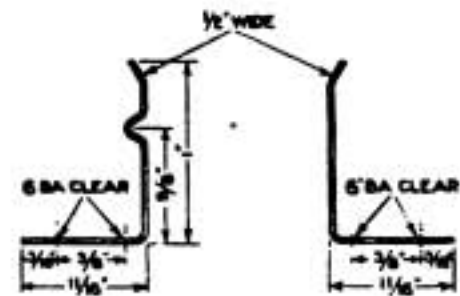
Dimensions of the contacts for the V24 Valve Holder.
